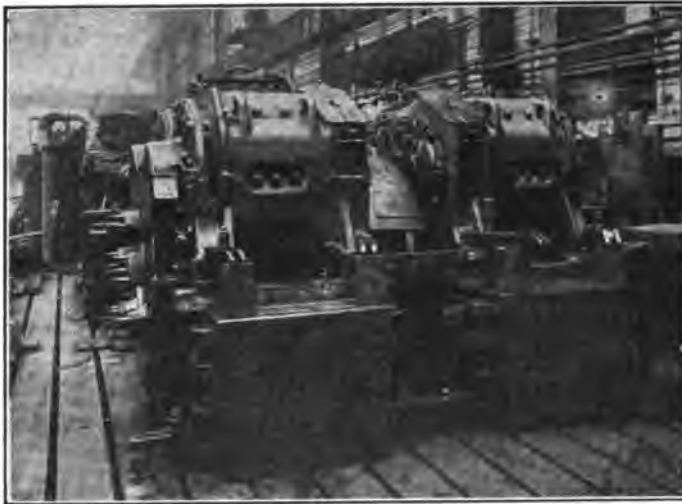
Two 700-H. P. MOTORS COUPLED TOGETHER FOR TEST
